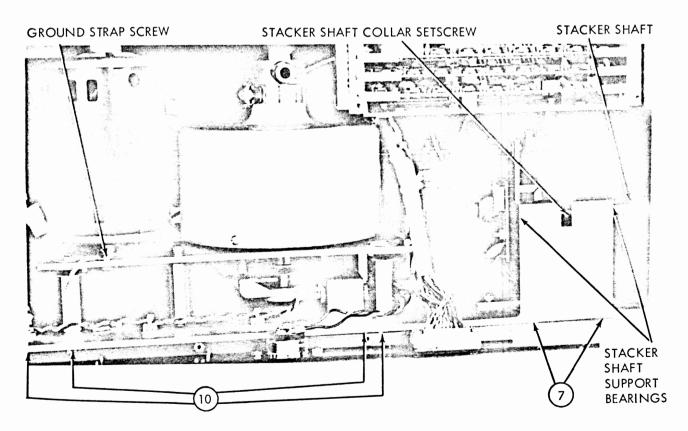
Rear View, Cover and Rear Connector Panel Removed
